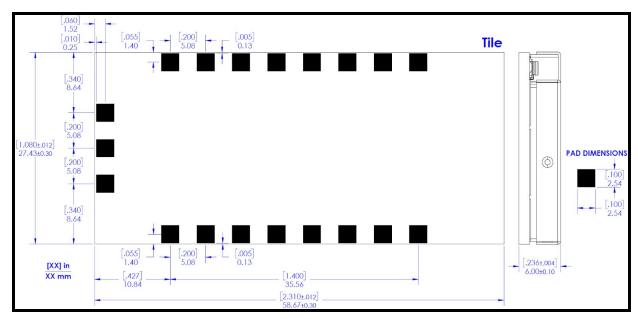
Location of solder pads on the underside of the Tile. Bottom view.
